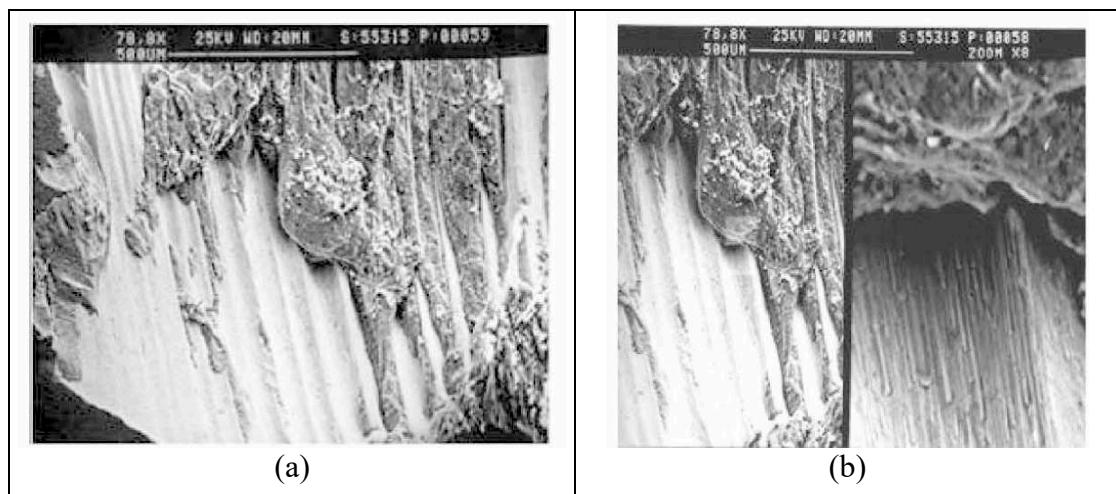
Worn surface of a multilayer (TiC/TiCN/TiN) coated mixed cemented carbide tool showing remains of adherent metal layer (a) and enlarged view of the crater wear showing smooth ridges with fine scoring in direction of chip flow (b) after machining titanium base, Ti-5Al-4Mo-(2-2.5)Sn-(6-7)Si alloy (NABHANI, 2001b).
